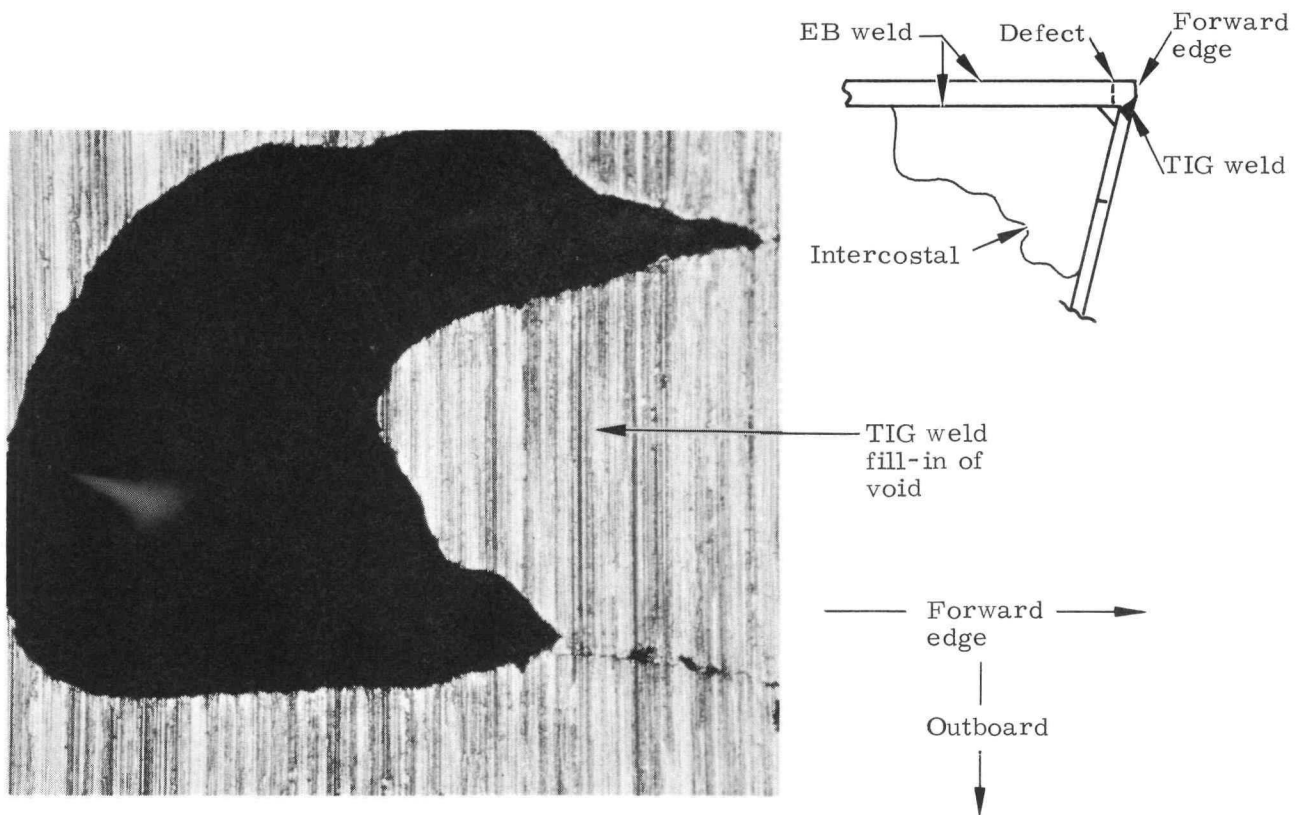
VOID DEFECT IN EB WELD OF RENE 41 SPECIMEN 2; MAGN 64X
